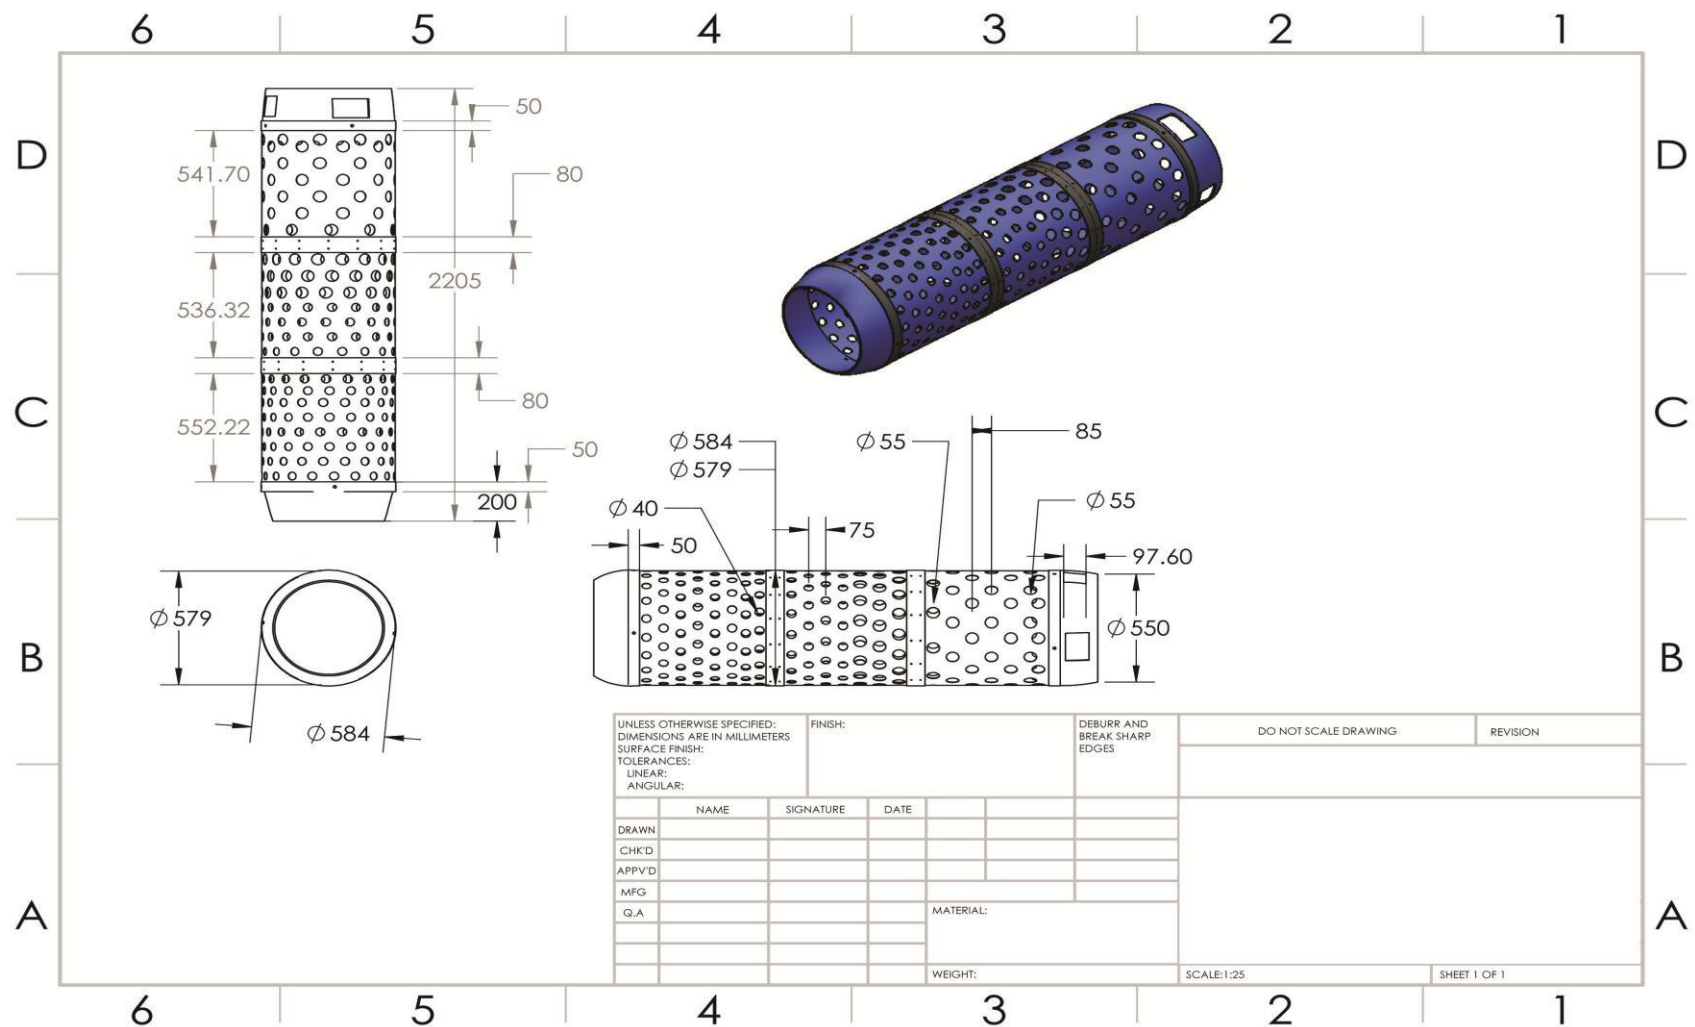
Engineering drawing of the grading unit (Dimensions are in mm)
